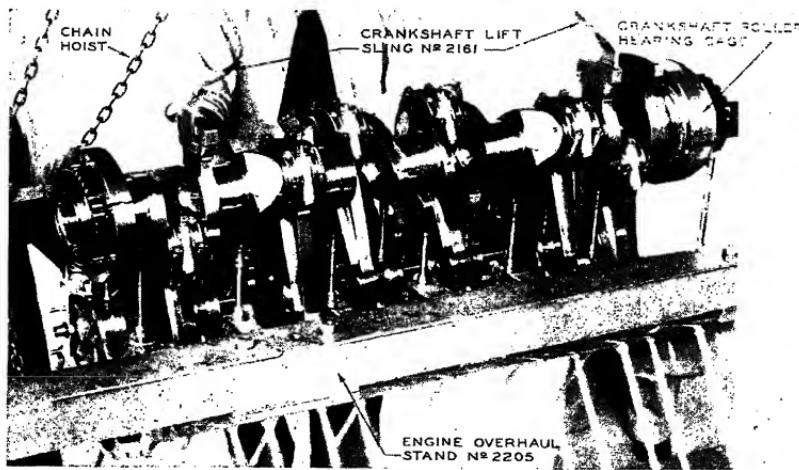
Lowering crankshaft assembly into upper crankcase.
